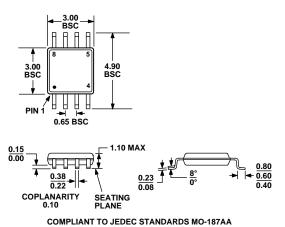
8-Lead Mini Small Outline Package [MSOP] (RM-8) Dimensions shown in millimeters
